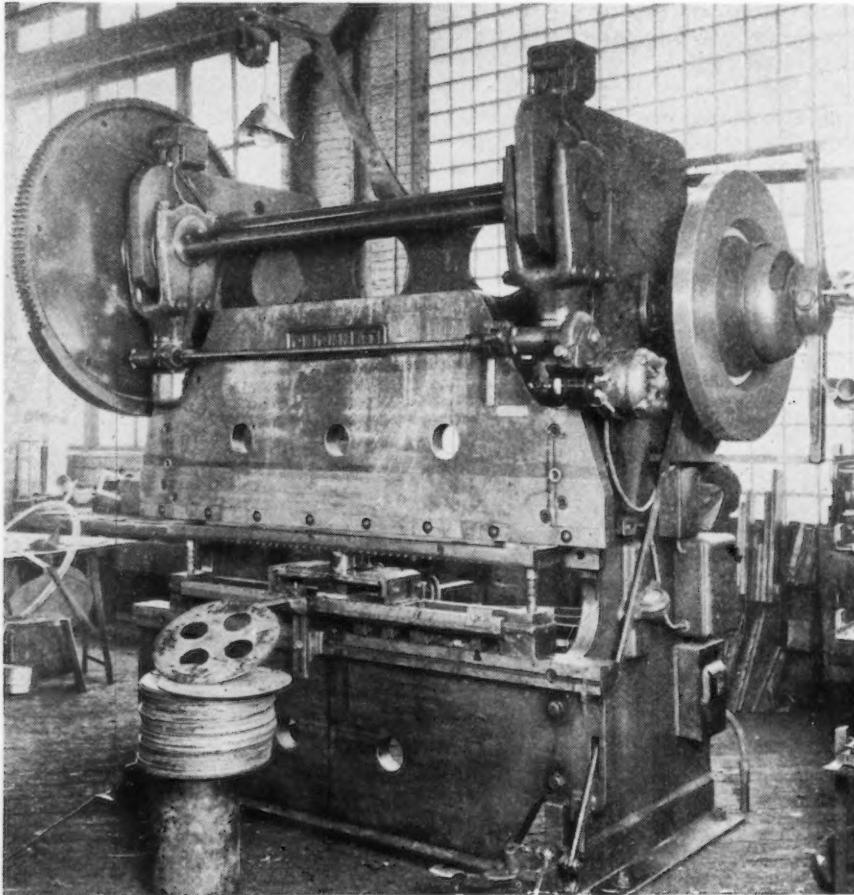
All punching and bending of the inside and outside box components that form the water jacket of the welded boiler are done on this 6-ft. Cincinnati press brake equipped with special dies and work locating fixtures. The machine is also used for work on parts of other Koven products, such as punching of the disks here shown.
